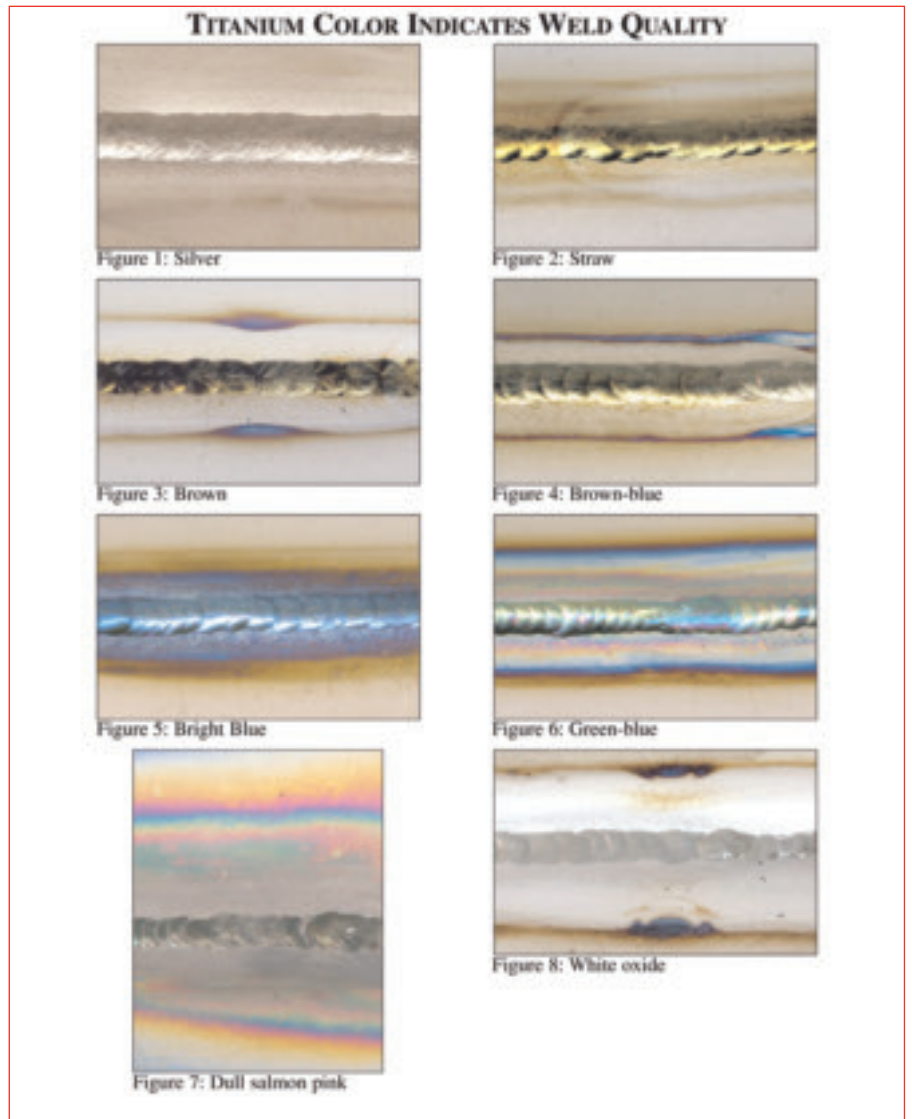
The color of a titanium weld indicates quality.
